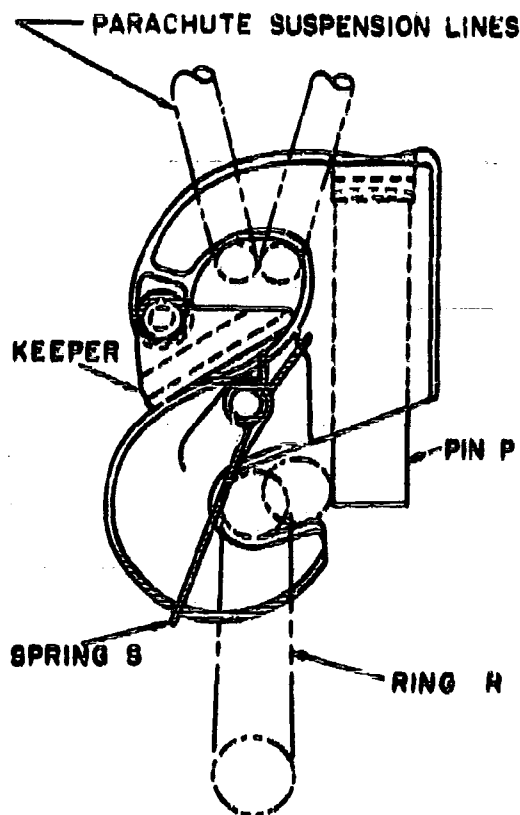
Parachute Canopy Release Assembly - Spring-Actuated Hook Type
